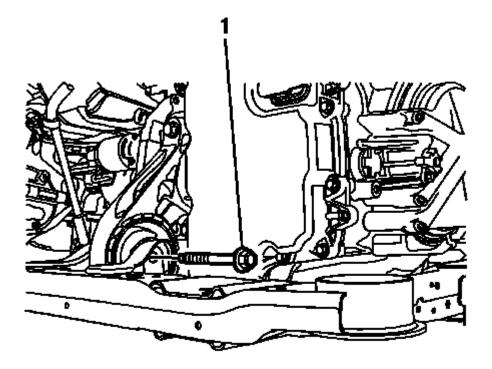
Identifying Front Transmission Mount Through Bolt Courtesy of GENERAL MOTORS COMPANY
